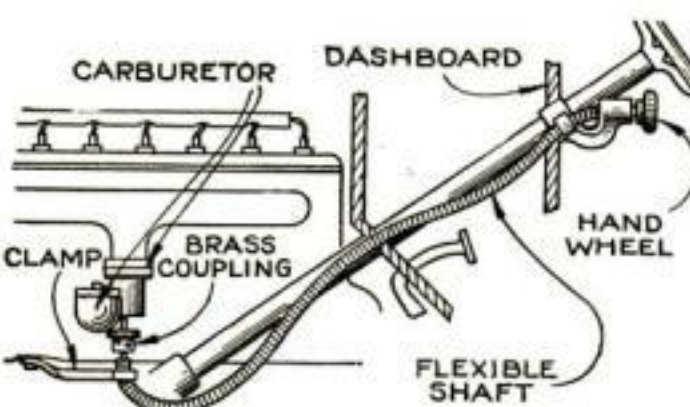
This hand control enables the driver to set the carburetor at the right mixture.
